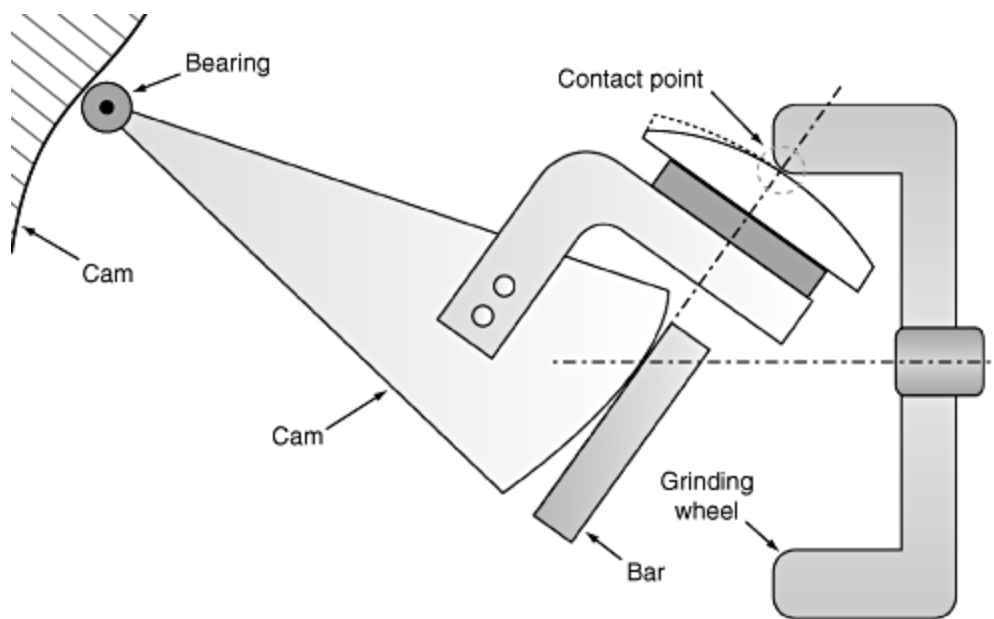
Schematic design of asymmetric grinding machine for early progressive lenses [108]
